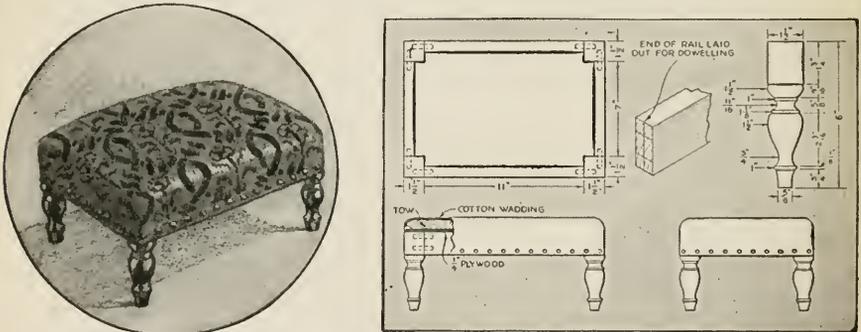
Left: A neatly finished footstool with simple turnings. Right: Side and end views, top view of the framework, and details of the legs and doweled joints.
